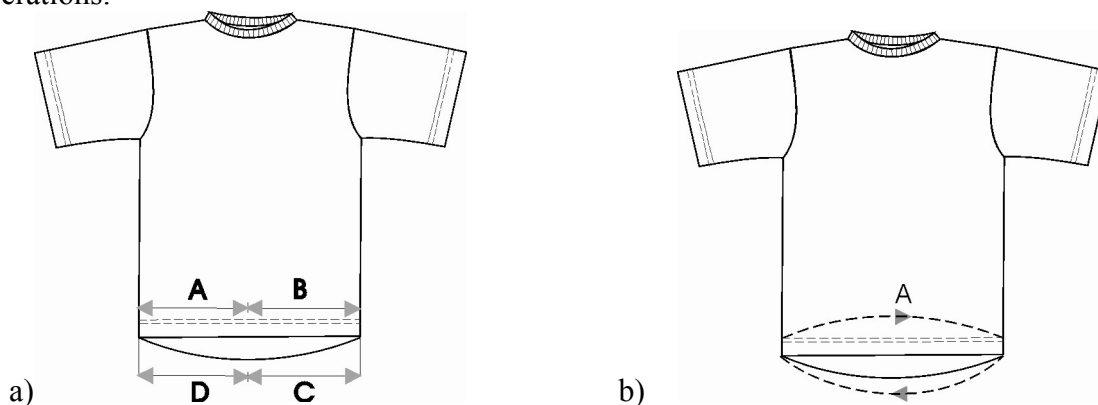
Sewing hem on women's T-shirt a) on speed sewing machine and b) on automatic sewing machine.
